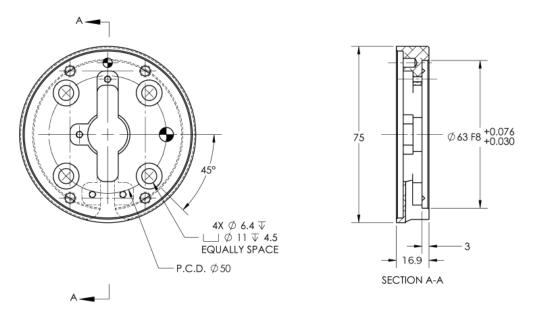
Coupling for ISO 9409-1-50-4-M6.
